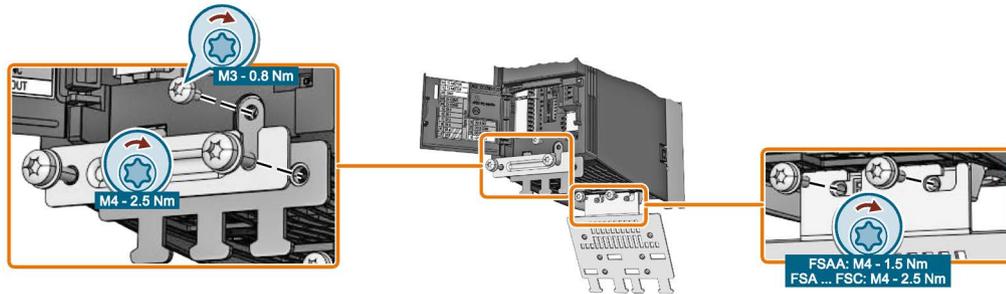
Mounting the shield plates using as example a frame size A inverter
